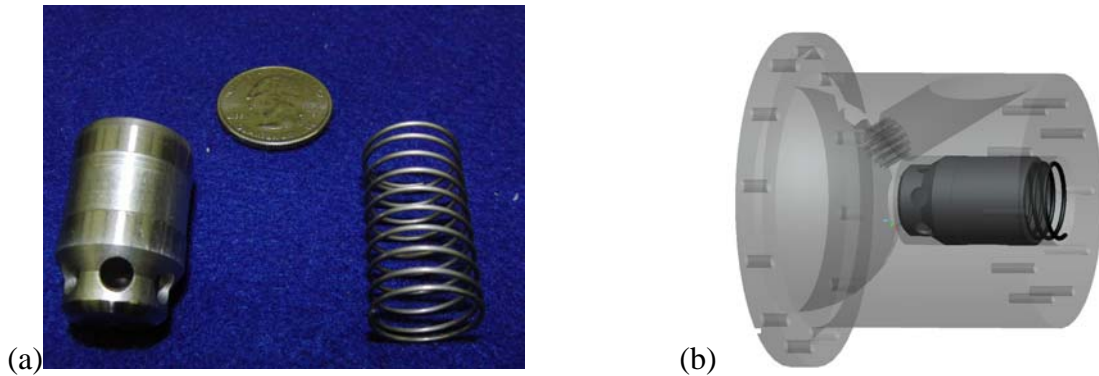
(a) Pump check valve piston and spring. (b) Check valve location in compression chamber.
